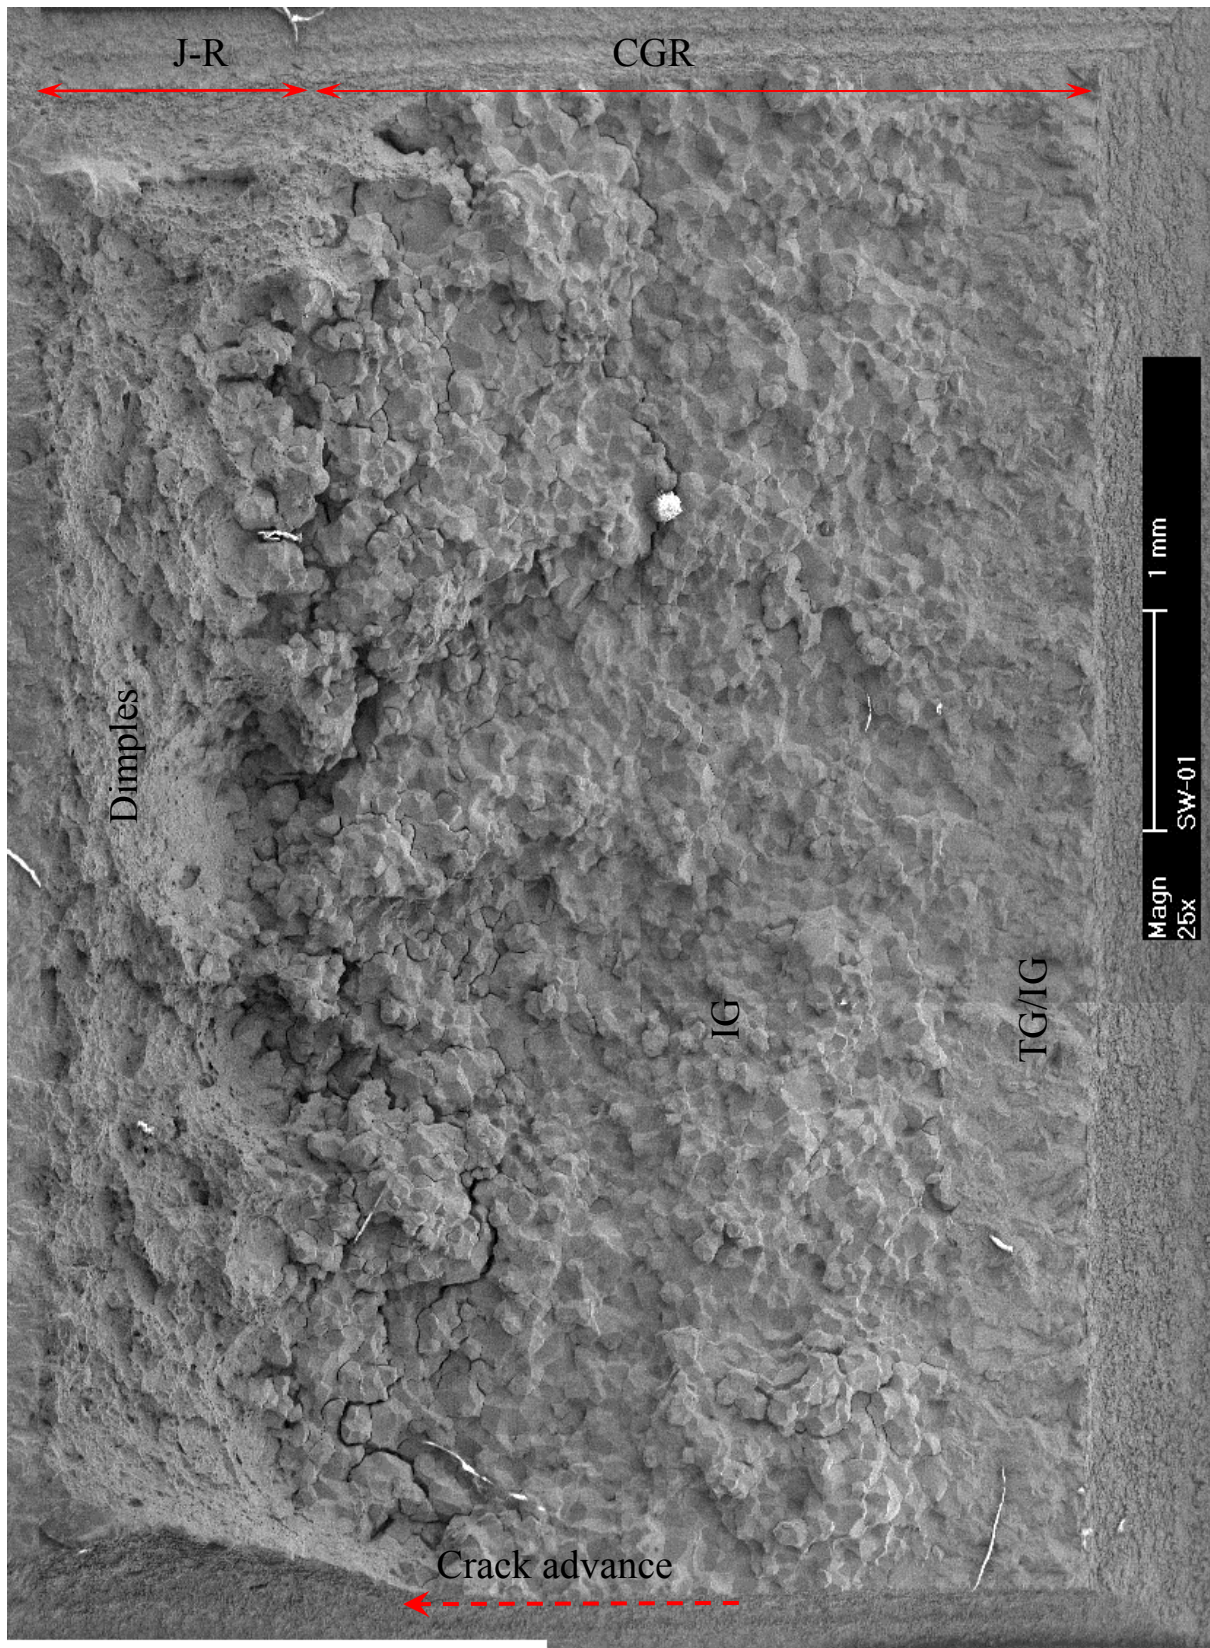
Fracture surface of specimen SW-01 tested in PWR water.
